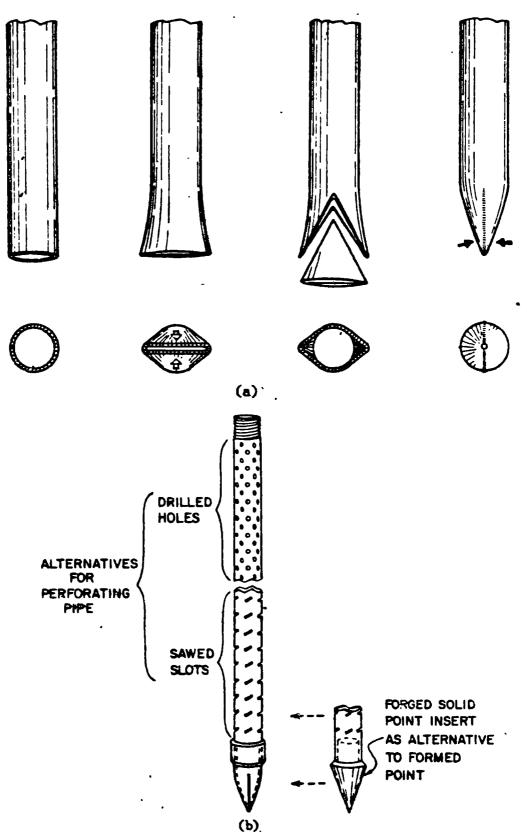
B-37 Drive point fabricated from pipe. (a) forming point on end of pipe; (b) alternative perforations and points
